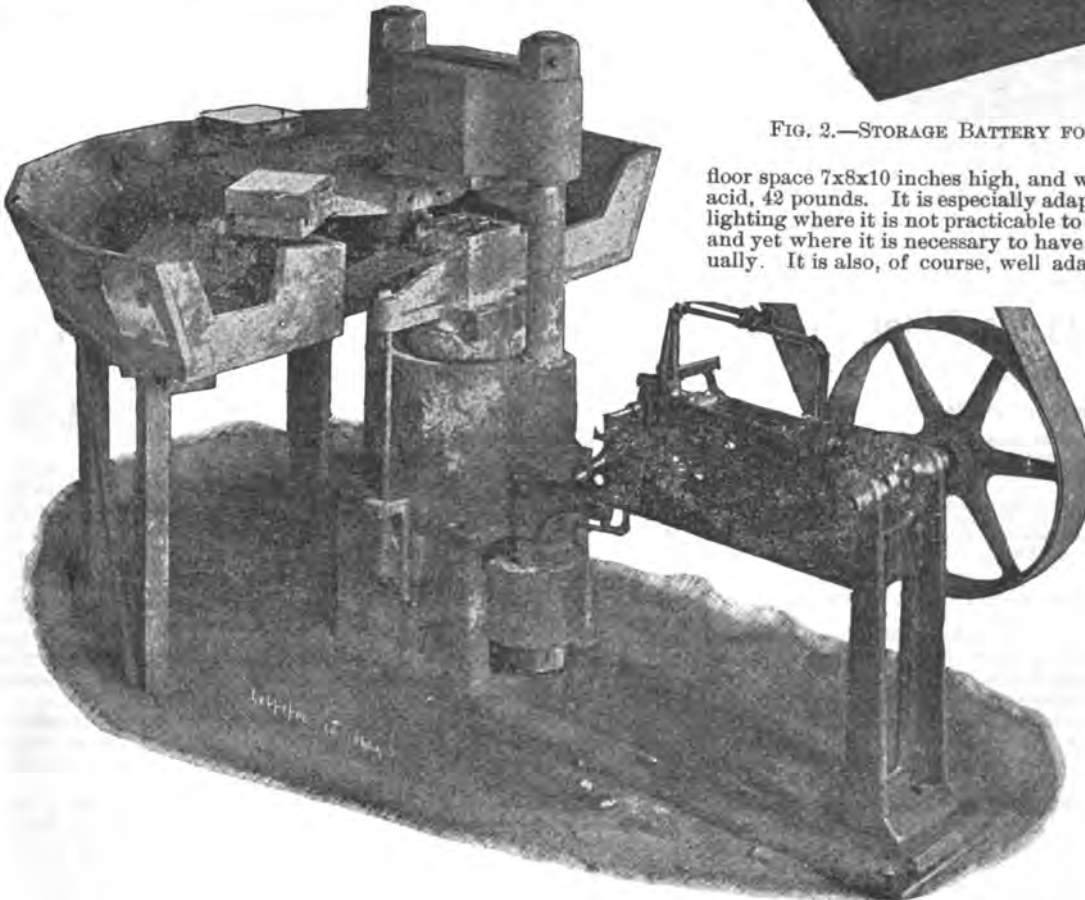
MECHANICAL FILLER FOR STORAGE BATTERY PLATES.
